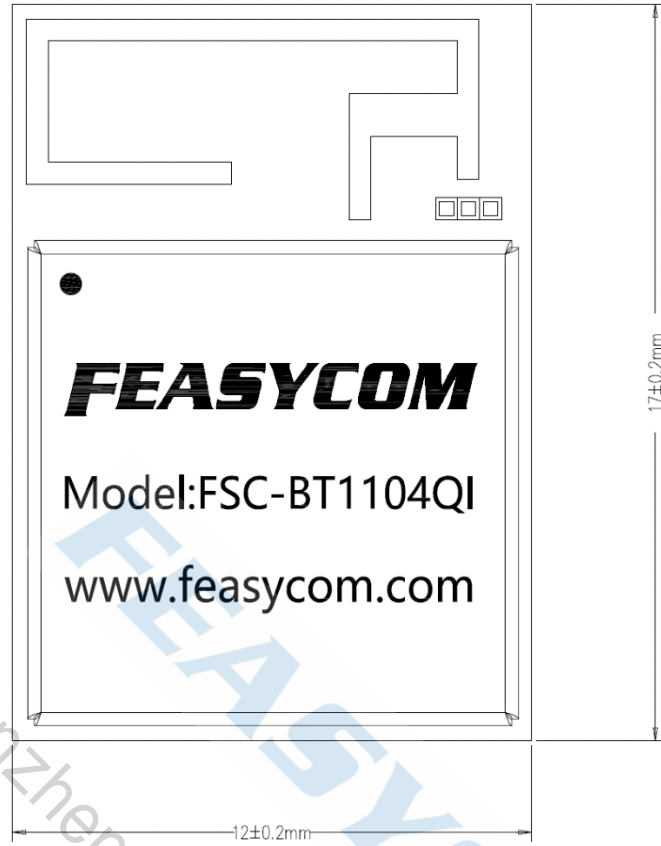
FSC-BT1104QI footprint Layout Guide (Top View)
